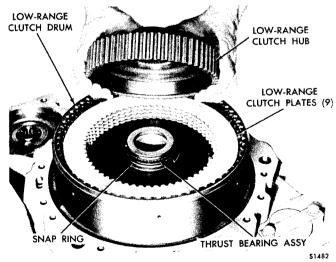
Installing low-range clutch hub (-3 overdrive model)
